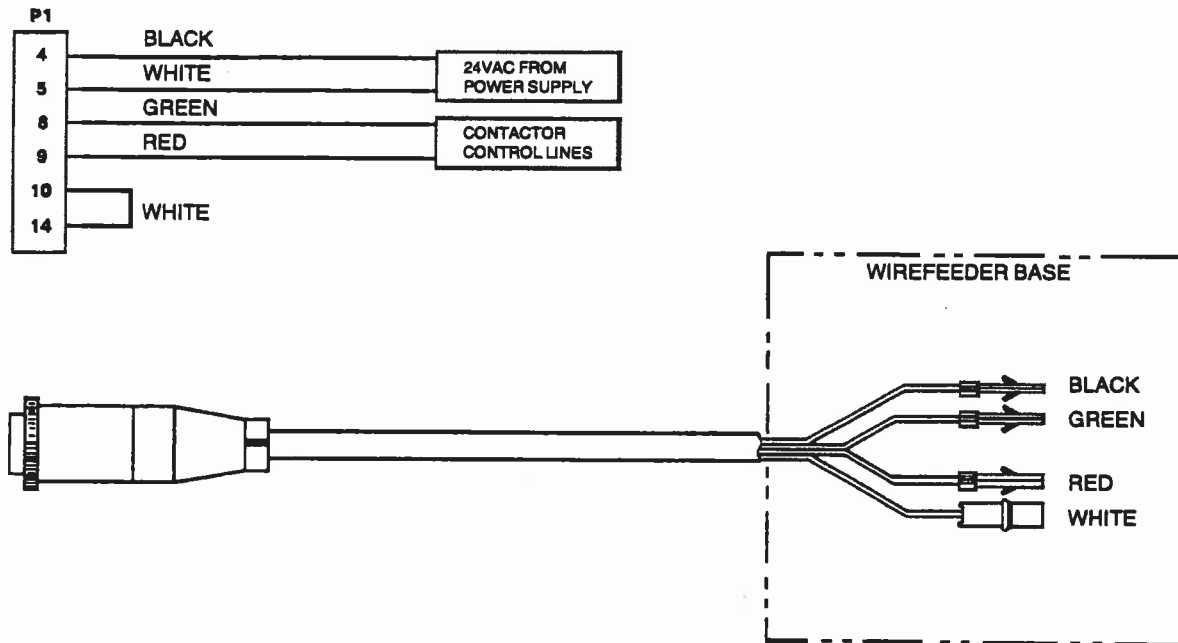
, POWER DRIVE I WIREFEEDER CONTROL CABLE WITH SCHEMATIC
